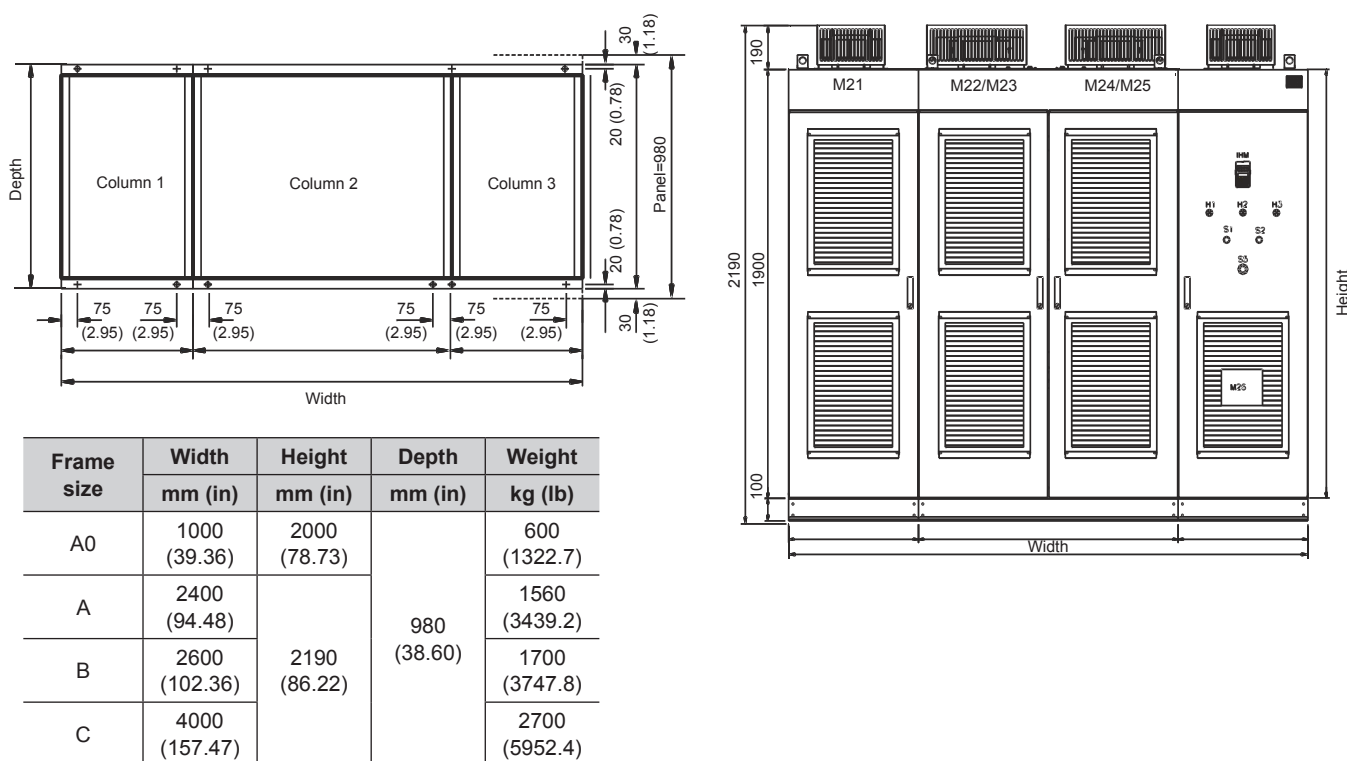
MVW-01 panel dimensions in mm and inches
